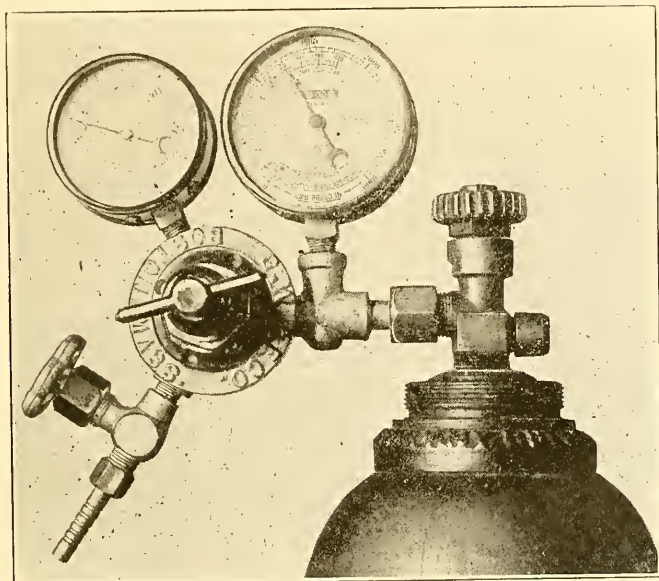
Regulator Attached to a Gas-Cylinder Valve.
